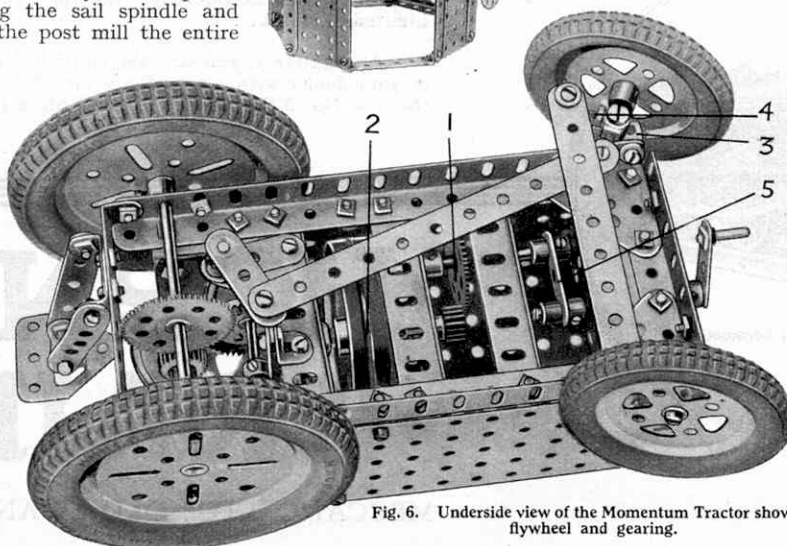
Underside view of the Momentum Tractor showing flywheel and gearing.
